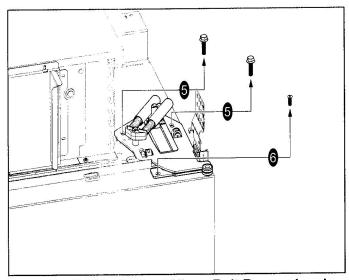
Cabinet Hinge Bolt Removal and Door Hinge Screw Removal
